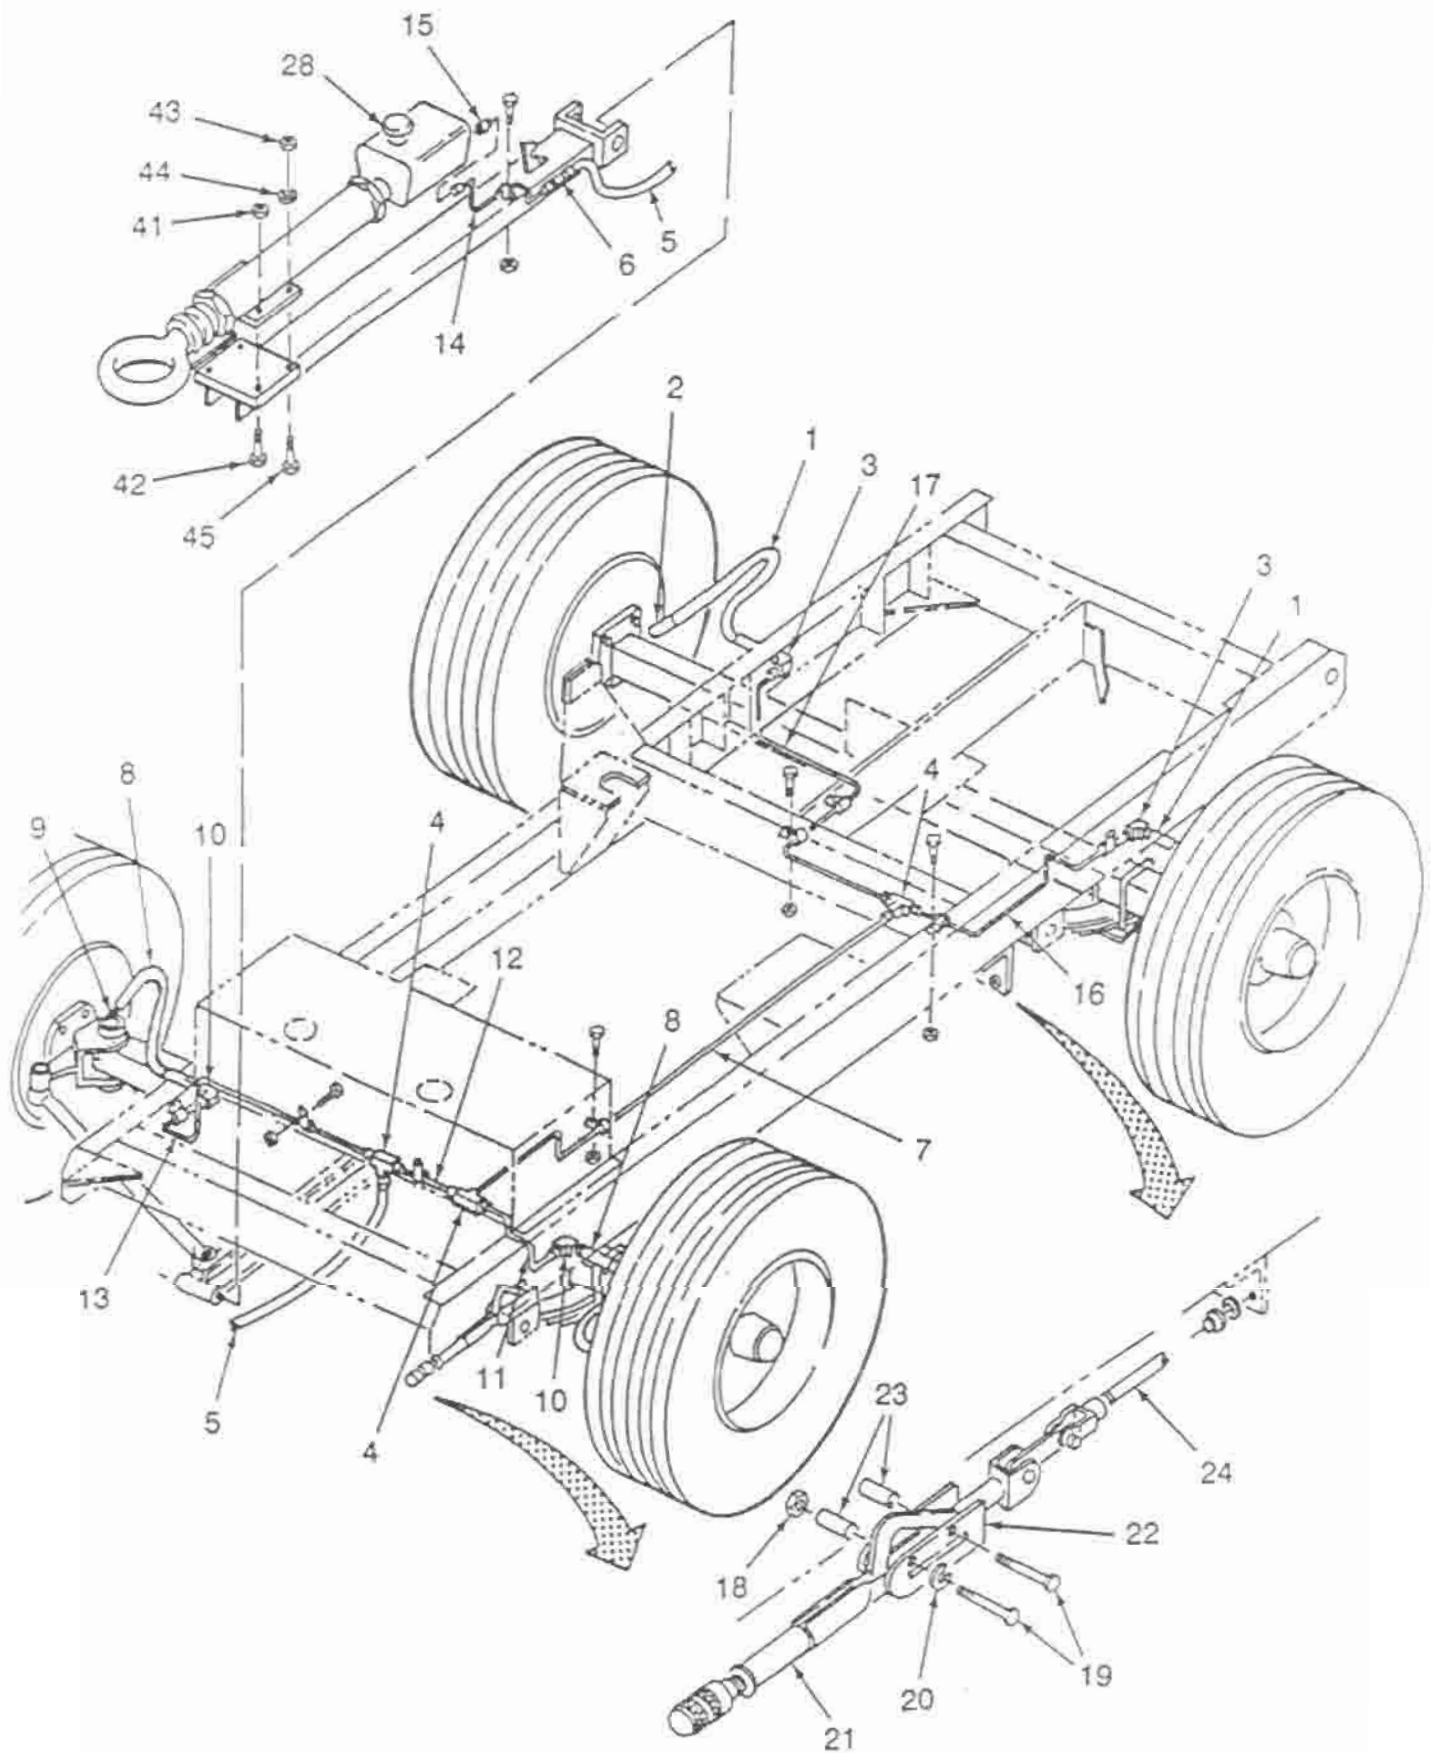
Hydraulic And hand Brake Connections (Sheet 1 of 2)
